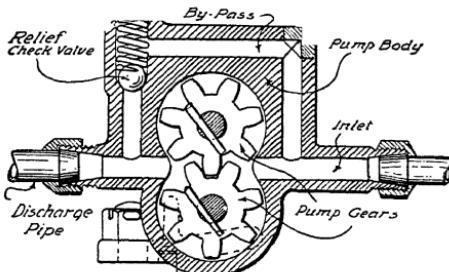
Gear-Type Oil Pump in Section, Showing Principles of Operation
